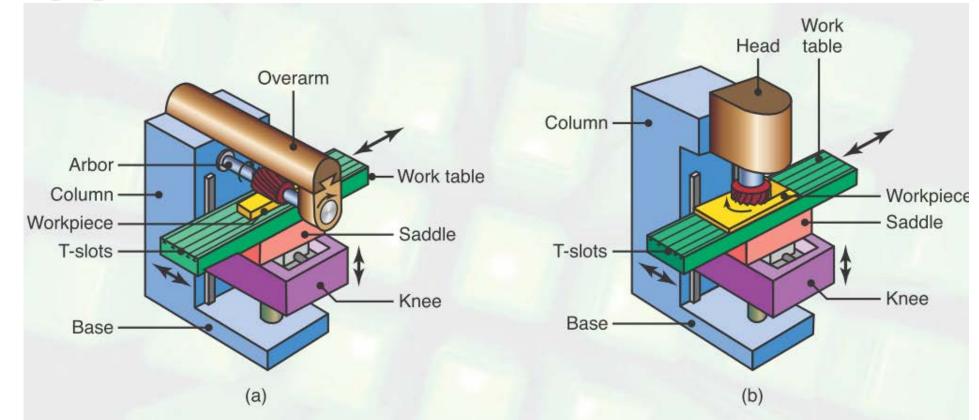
(a) Schematic illustration of a horizontal-spindle column-and-knee-type milling machine. (b) Schematic illustration of a vertical-spindle column-and-knee-type milling machine. *Source:* After G. Boothroyd.
